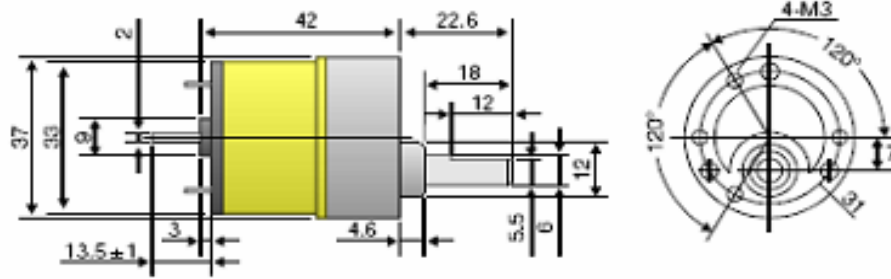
Gear-motor Dimensions and Mounting Pattern (mm) [30]
